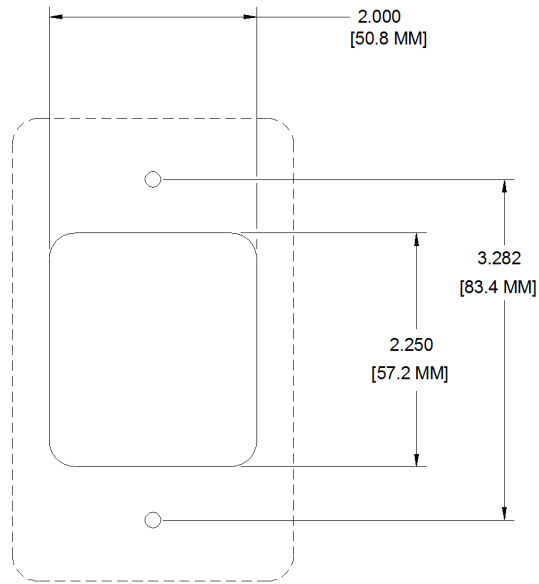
MIO MODERO IR MOUNTING DIMENSIONS
